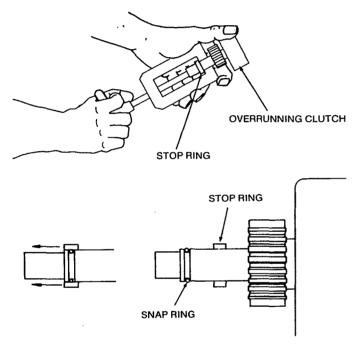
ADJUSTING PINION SHAFT END PLAY
